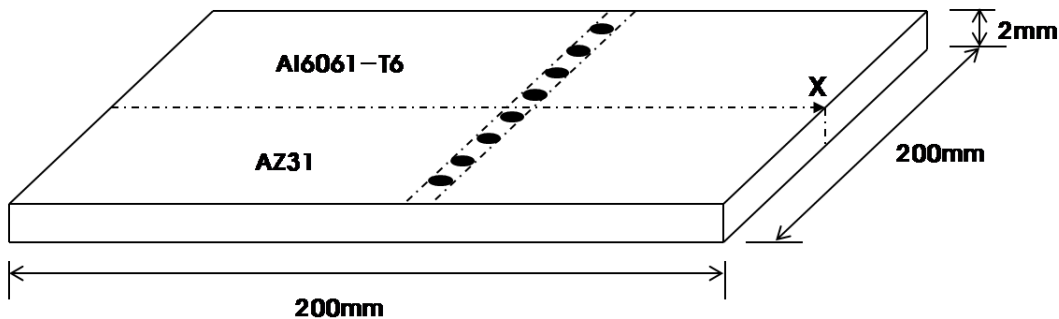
Measurement Points of Welding Residual Stress
